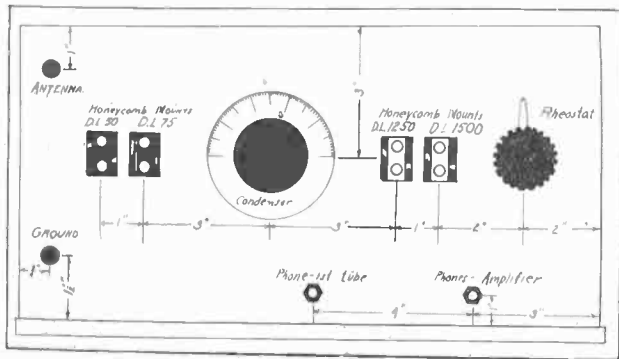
Front panel layout giving dimensions and measurements for drilling. The low wave coils are on right hand side, the high on the left. Fig. 3 (at right) shows layout of apparatus on baseboard and rear of panel.
